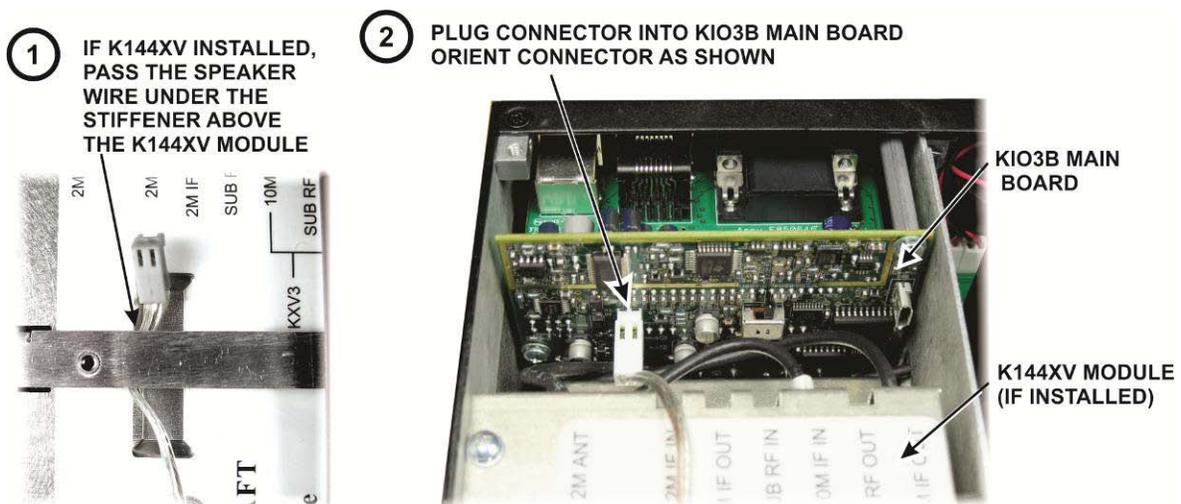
Connecting the Speaker Cable to the KIO3B Board.
